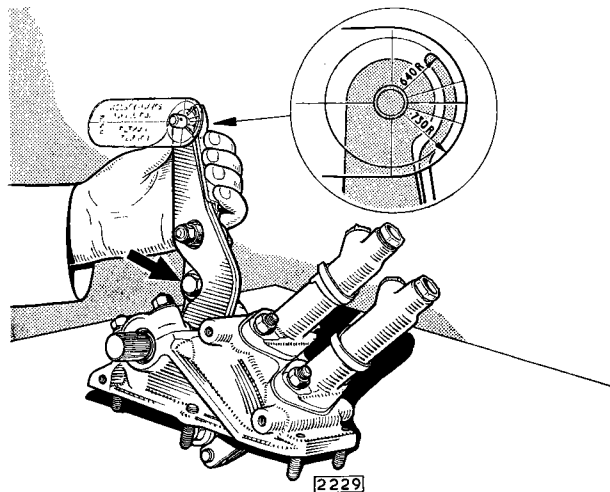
Checking the servo operating lever setting using special tool No. 9020
